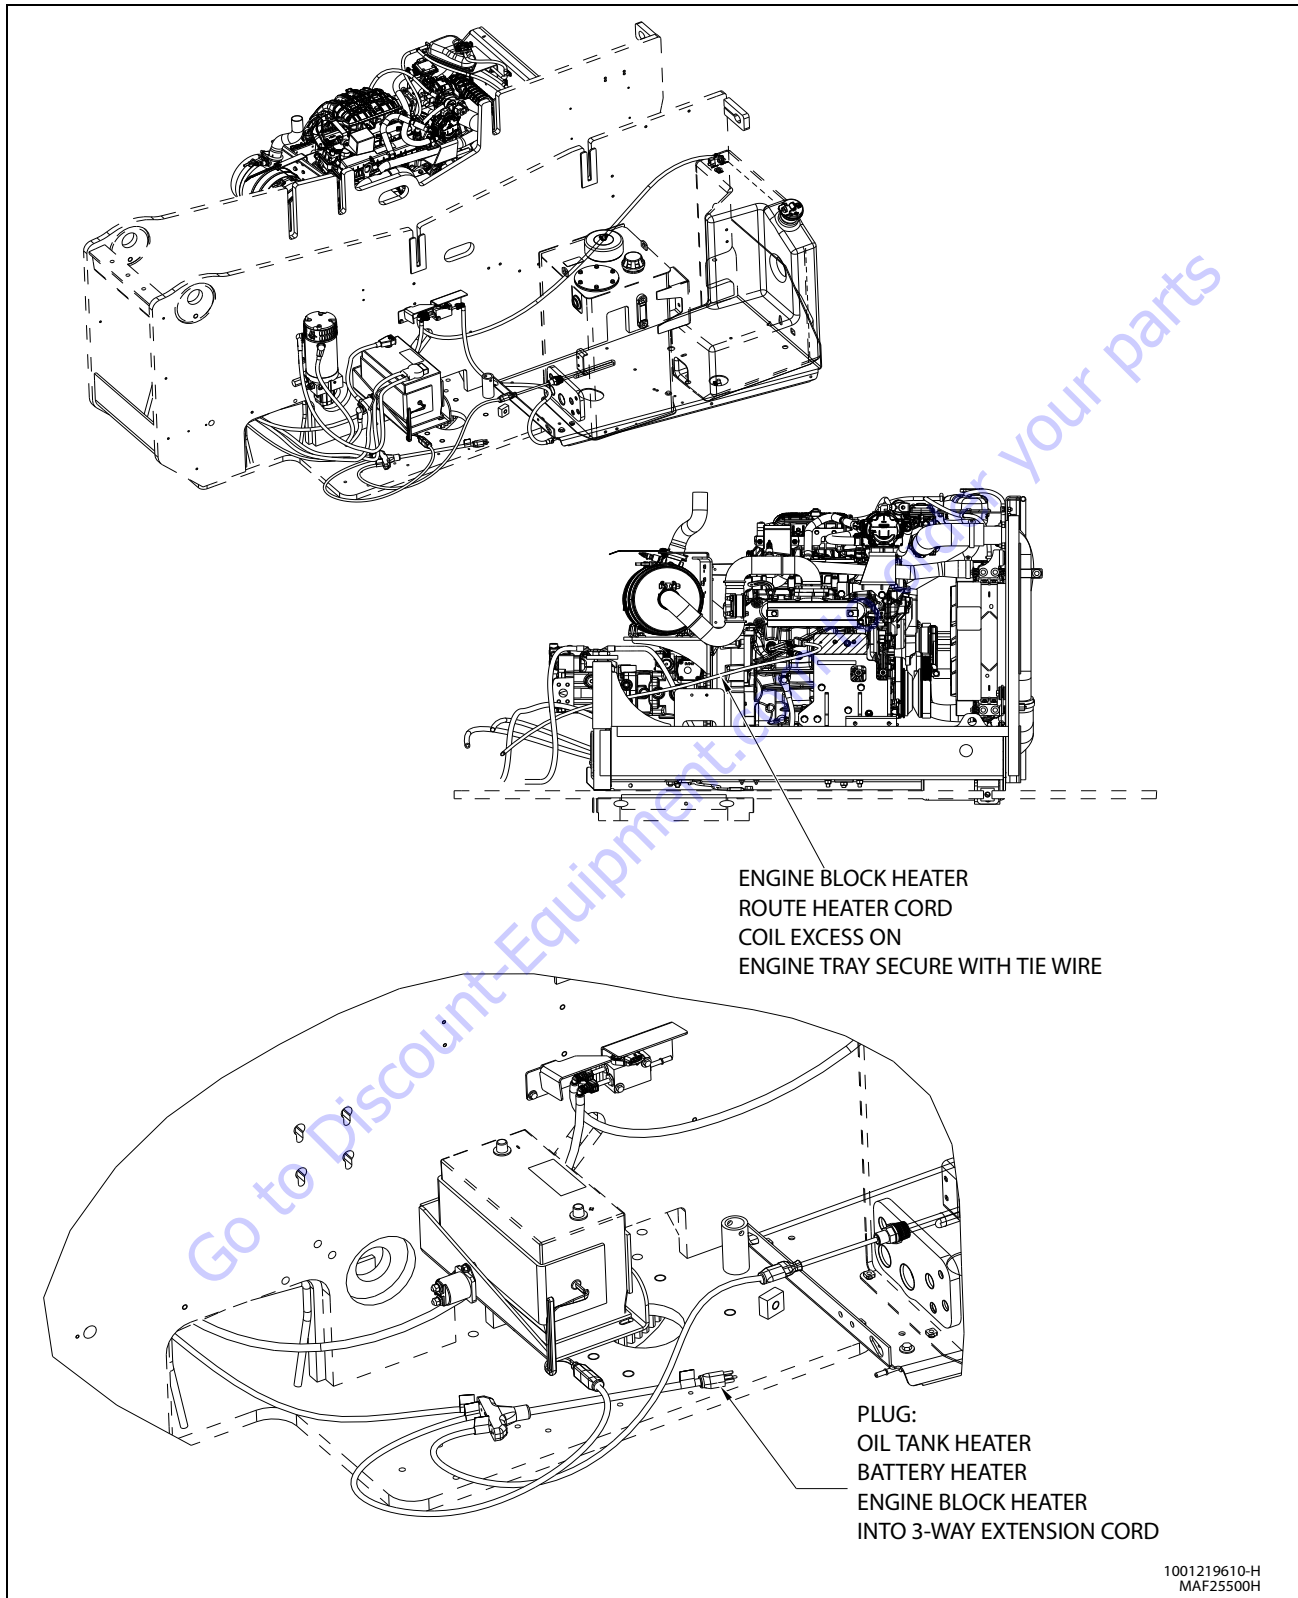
Ford Engine Installation (With Arctic Package) - Sheet 5 Of 5
